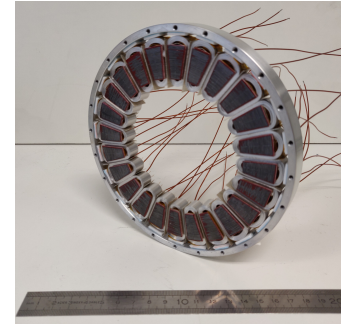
Prototype axial flux machine stator with anodised aluminium foil tooth coils (before potting)
